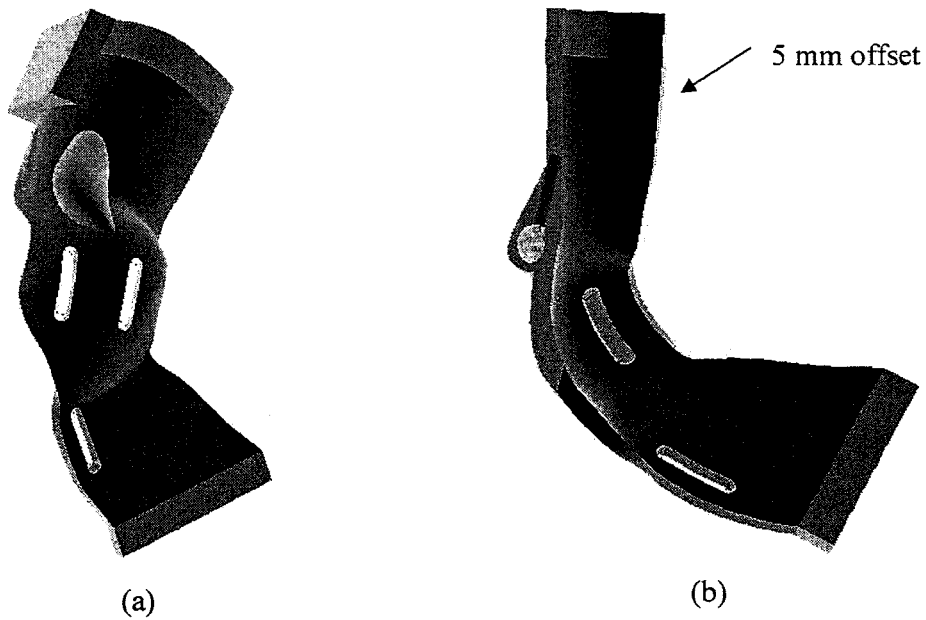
AFO having integrated arrangement for fixing single spherical ball & socket joint (a) back view (b) sectional side view (See color section)
